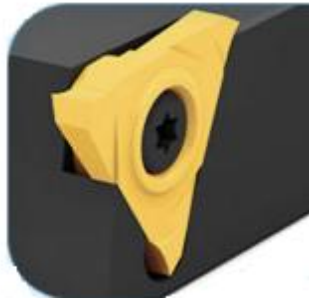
Groove cutters with lateral mounting of multifaceted plates
